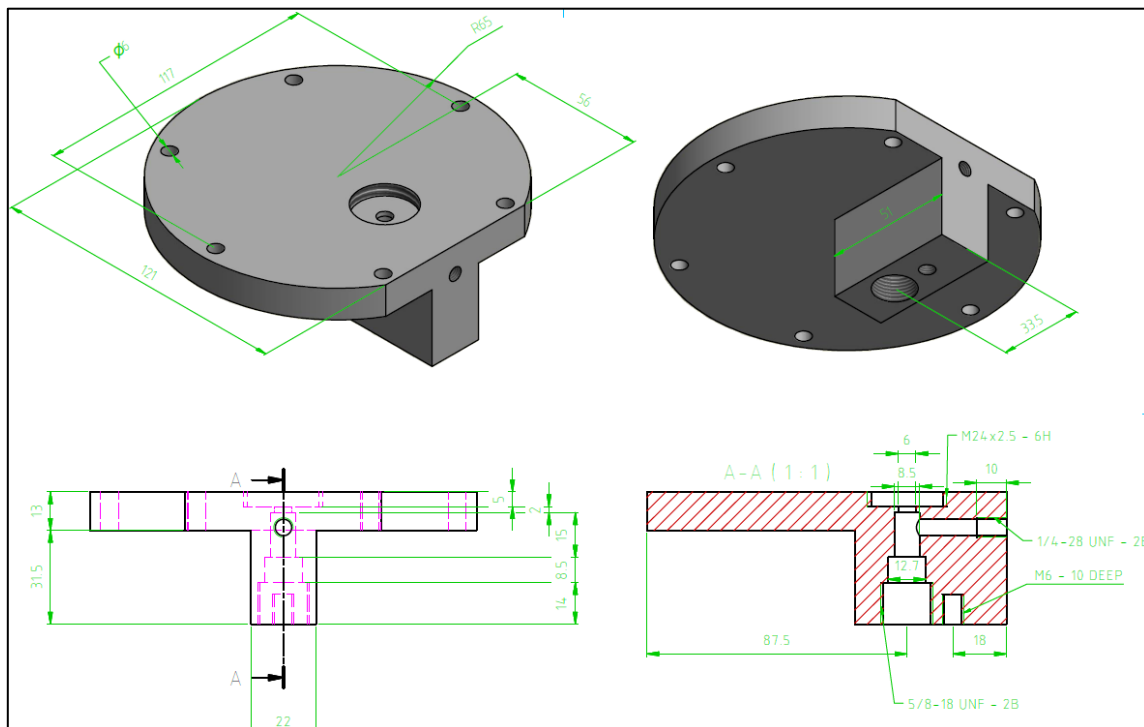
Drawing of the bottom flange and housing for the screen (3-D drawings drawn in Autodesk Inventor by Dr Nelson, 2017).
